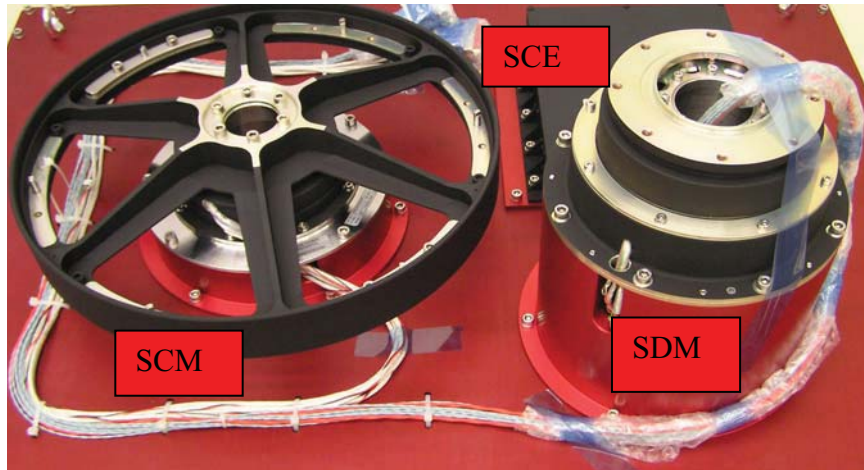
Scan Drive Equipment mounted to the Transportation Jig.
